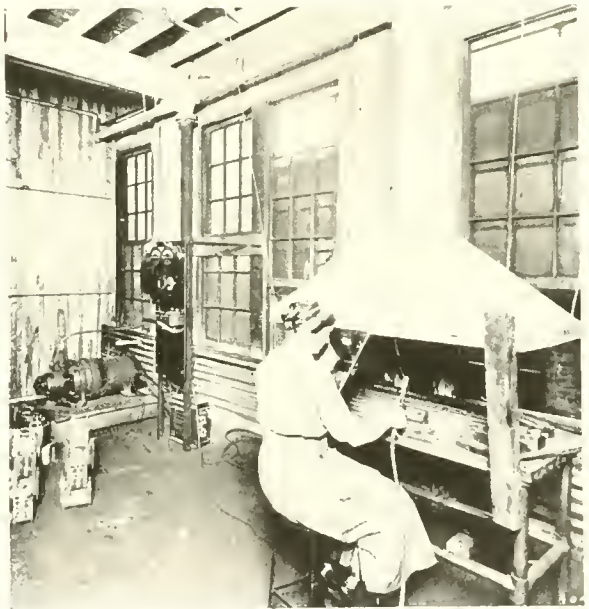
Factory production of auto starter frames using Lincoln Arc Welder.
